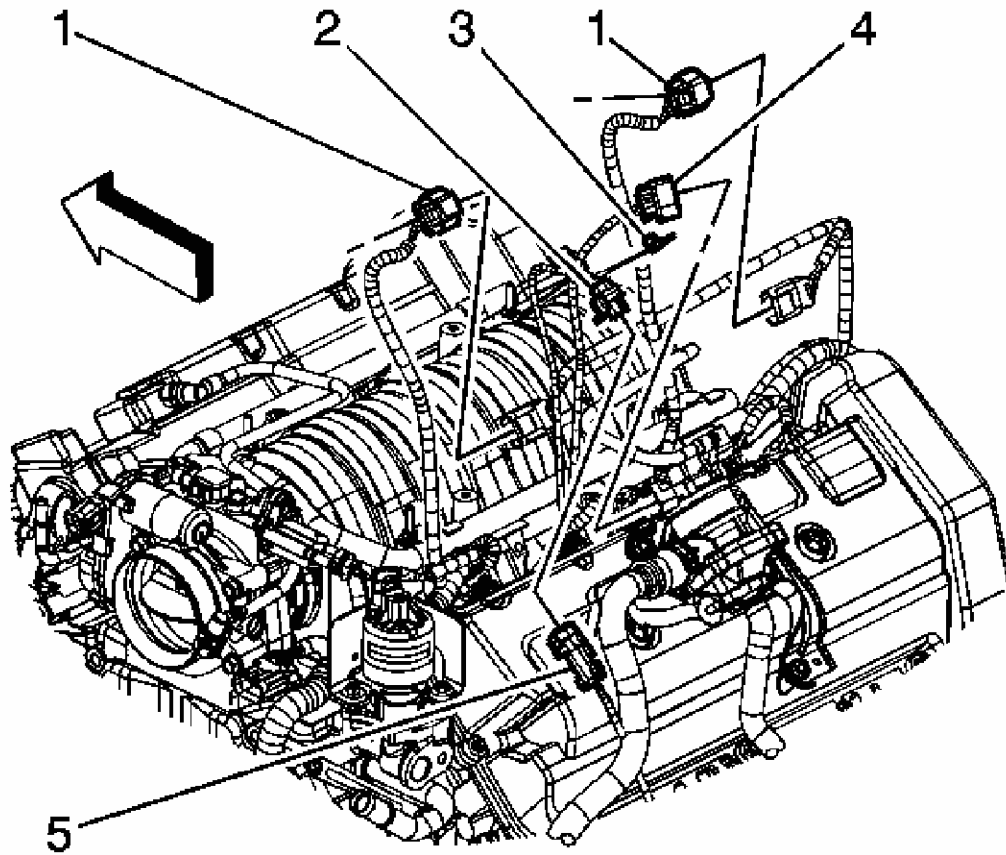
Identifying Engine Harness Electrical Connector To Starter Solenoid
